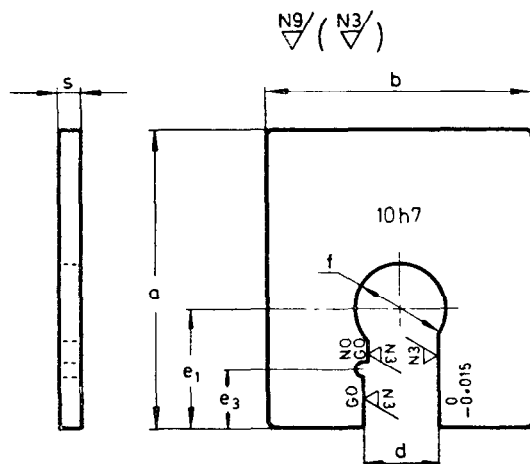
DIMENSIONS FOR SINGLE ENDED PROGRESSIVE TYPE PLATE
